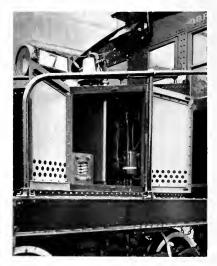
Locomotive shown in Fig. 1, End Cab in Place but with Doors Opened to Permit Inspection
